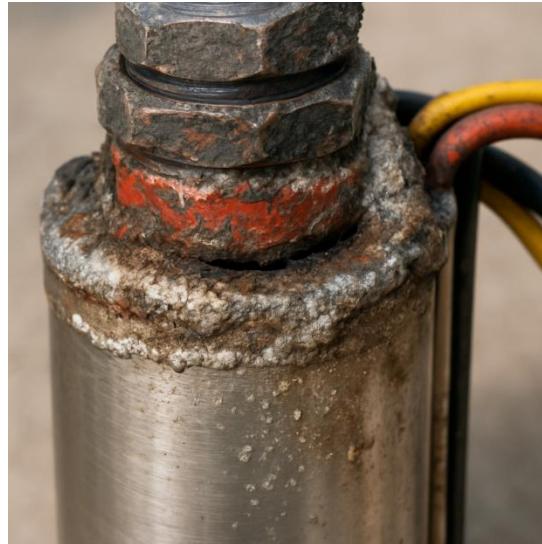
Stray electrical currents formed a hole in this submersible pump, causing the well to fail.
